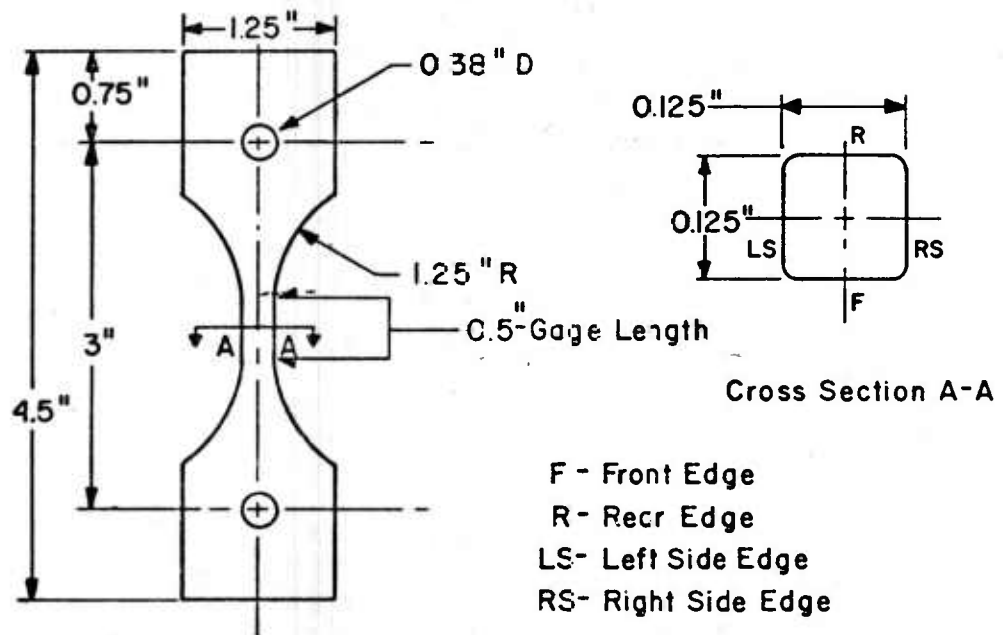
Tensile Stress Rupture Test Specimen Dimensions.
